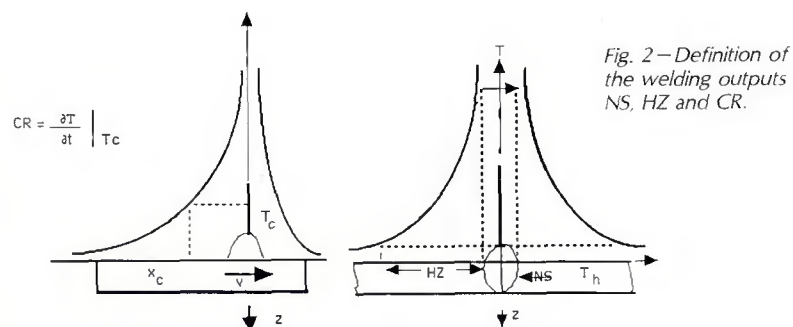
Definition of the welding outputs NS, HZ and CR.
